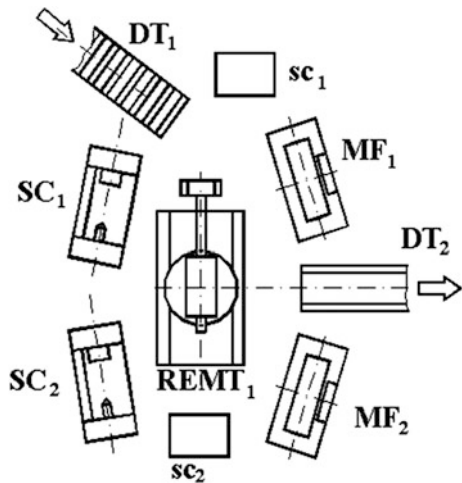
presents the layout of the manufacturing cell, and in Fig. 19a–c, there are several pictures of the machining manufacturing cell for the shaft family, using the robot REMT-1.
